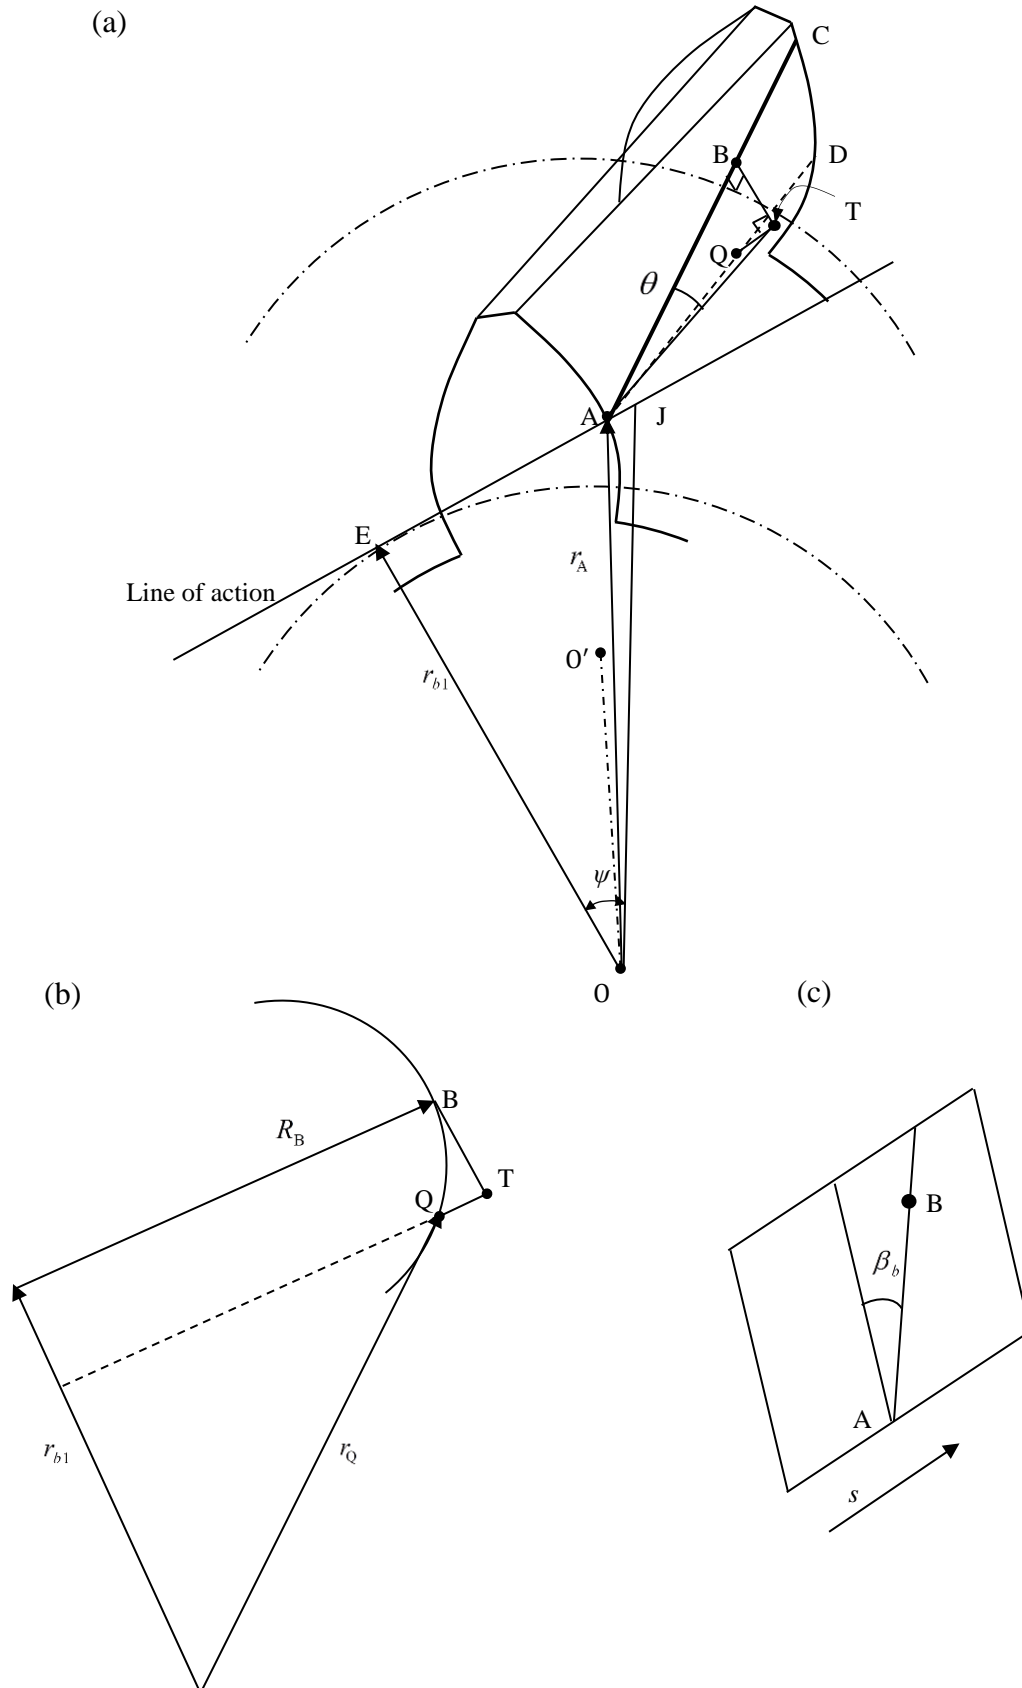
Schematic drawing of helical gear tooth contact; (a) 3D drawing for a pinion tooth, (b) parabolic approximation for the contact and (c) s position of point B with respect to point A
